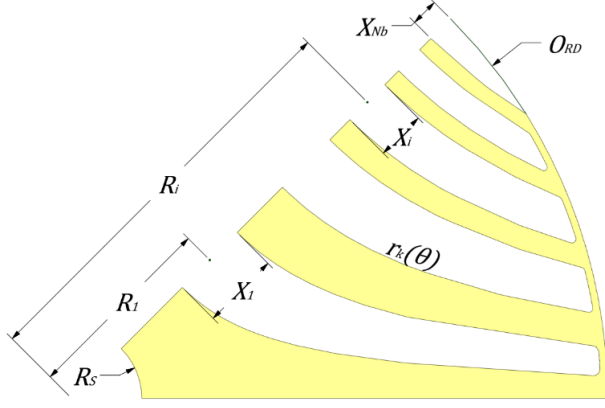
Fluid-shaped rotor barriers (half pole) and design variables.
